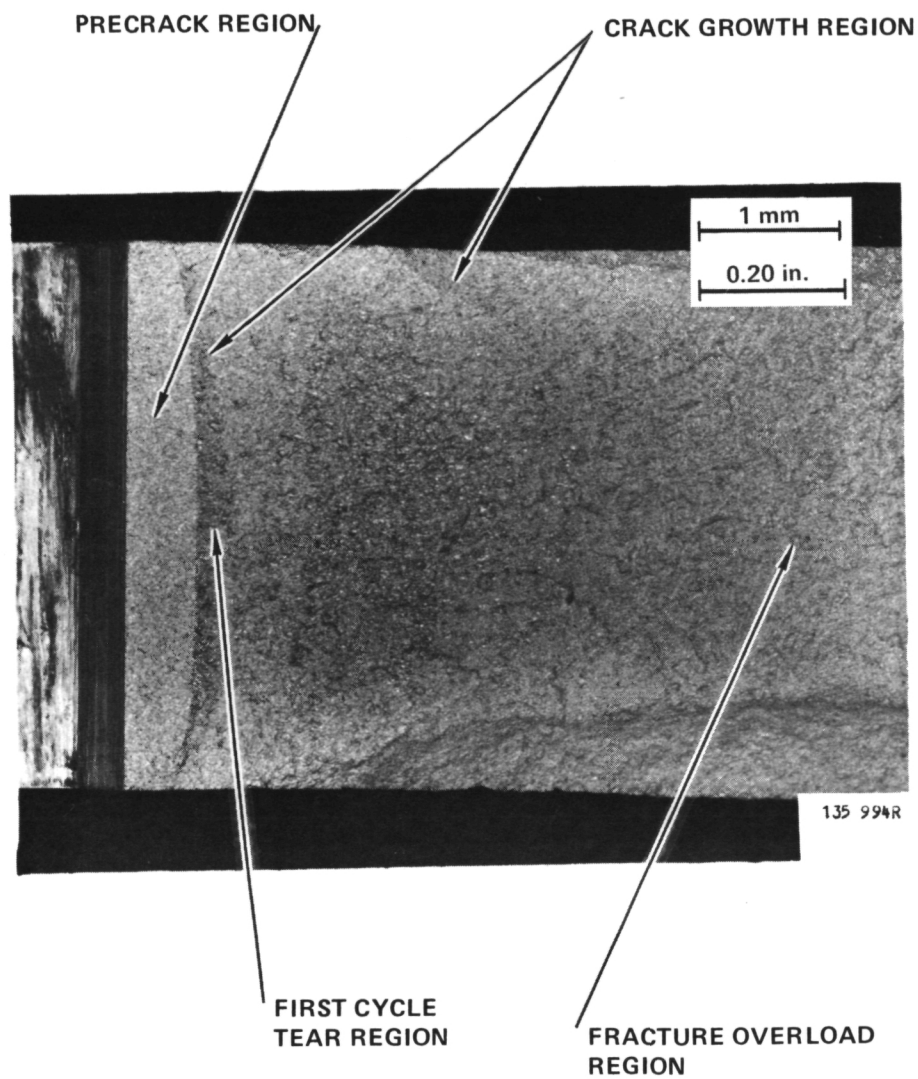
Fracture Surface of WOL Coupon 8CR-2
